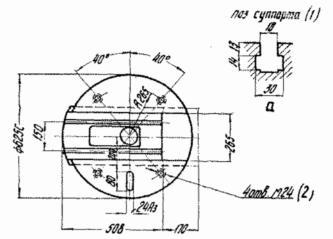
Sketch of spindle extension of machines, models 2622 and 2622 A
